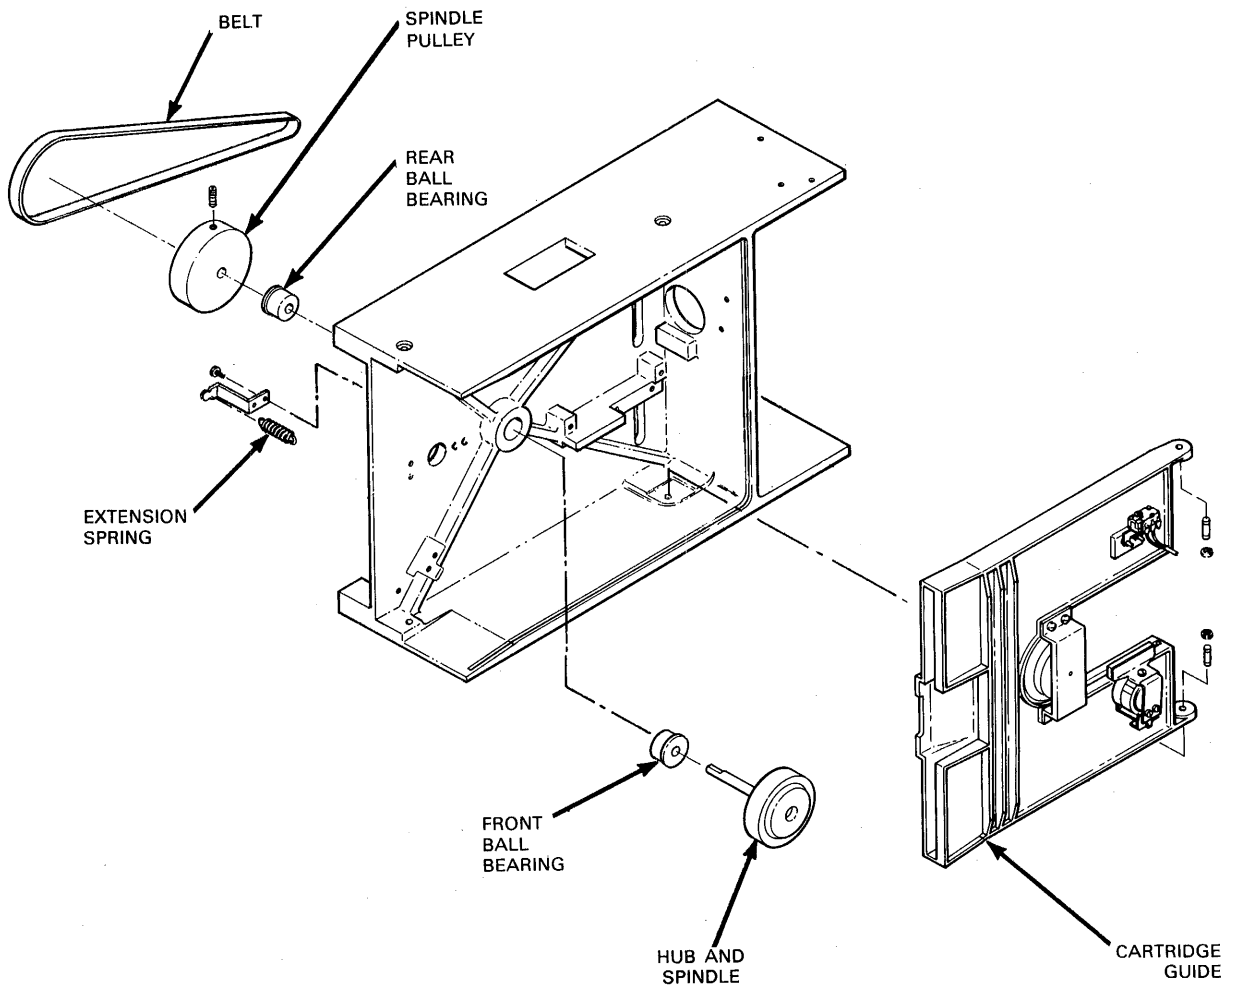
Hub and Spindle Assembly Removal and Replacement
